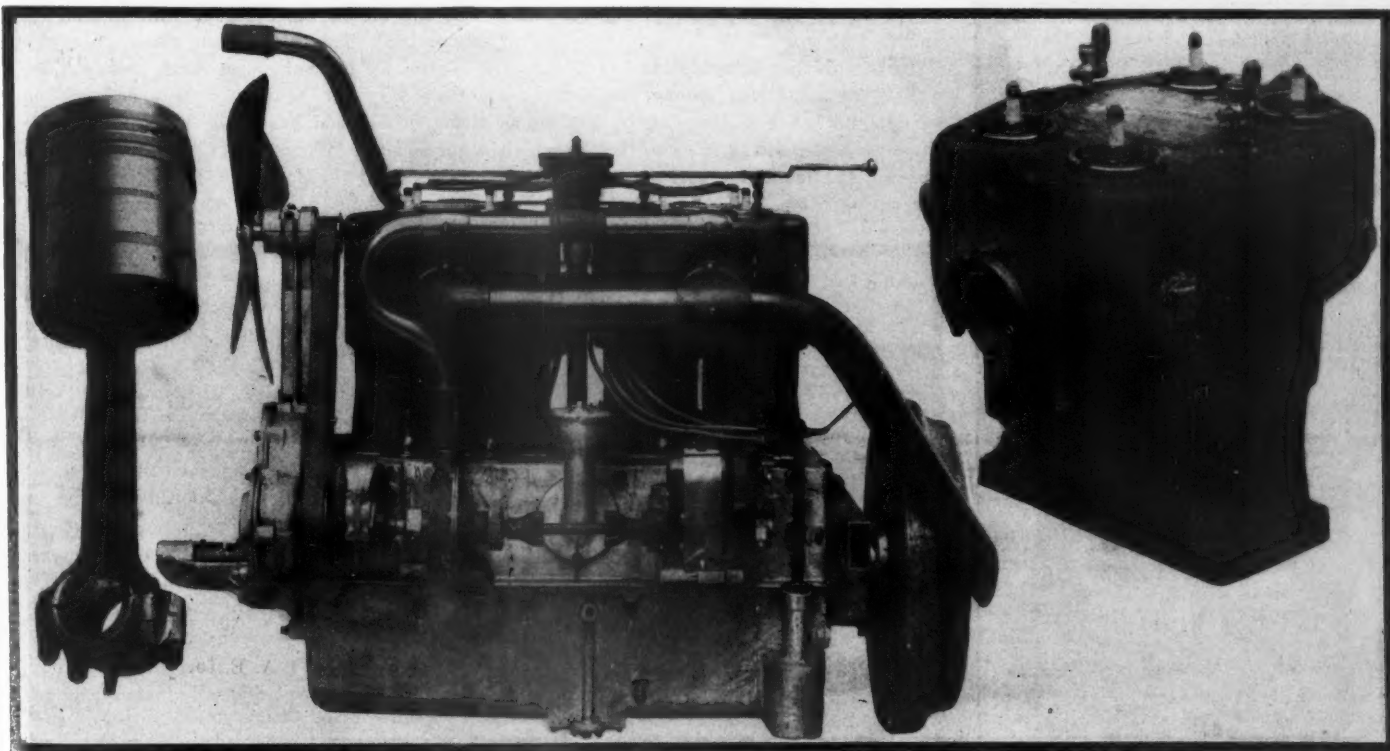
NATIONAL 40 MOTOR, TWIN-CYLINDER CASTING AND PISTON UNIT
